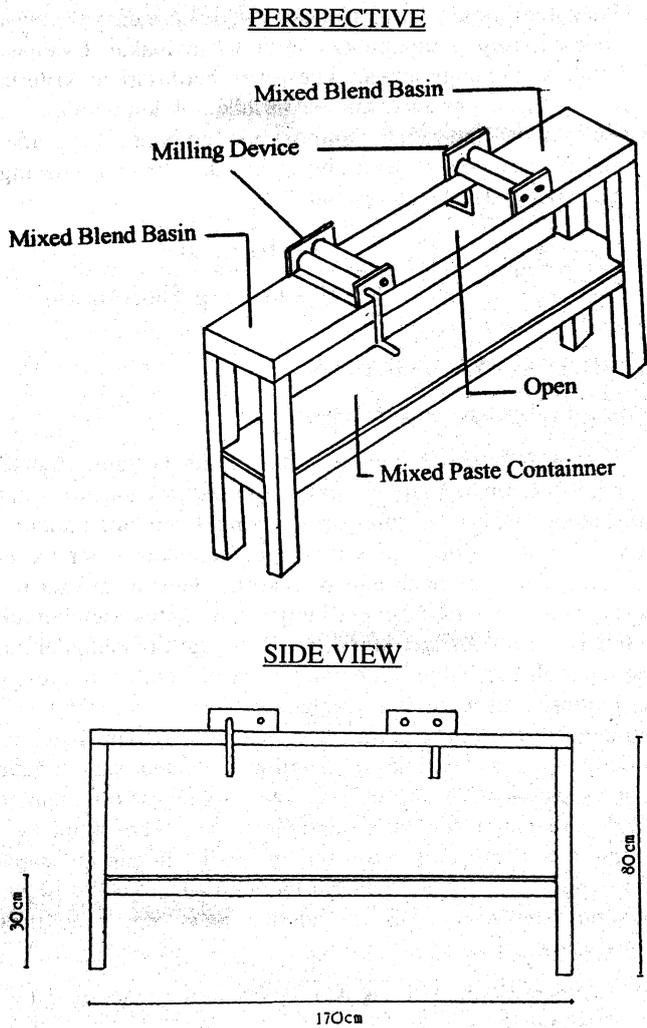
a. The Type of Machine Which is Used Currently (Perspektif And Side View)
